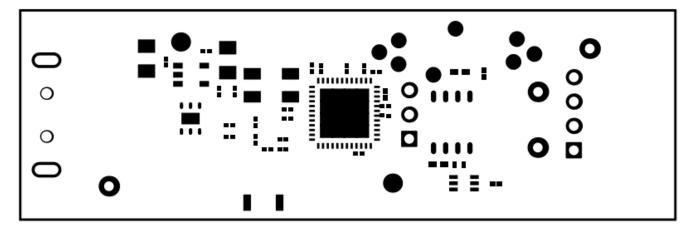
TMF0008EVM Solder Mask (Bottom)
